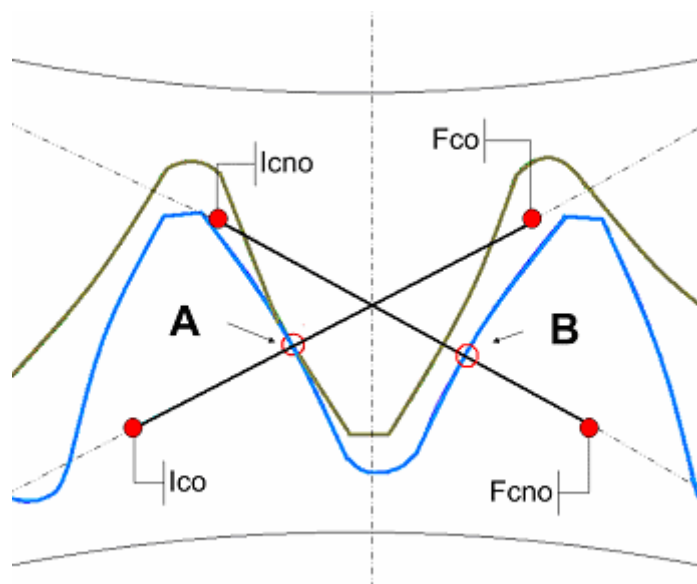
Contact between gears: a) front side contact; b) back-side contact.
